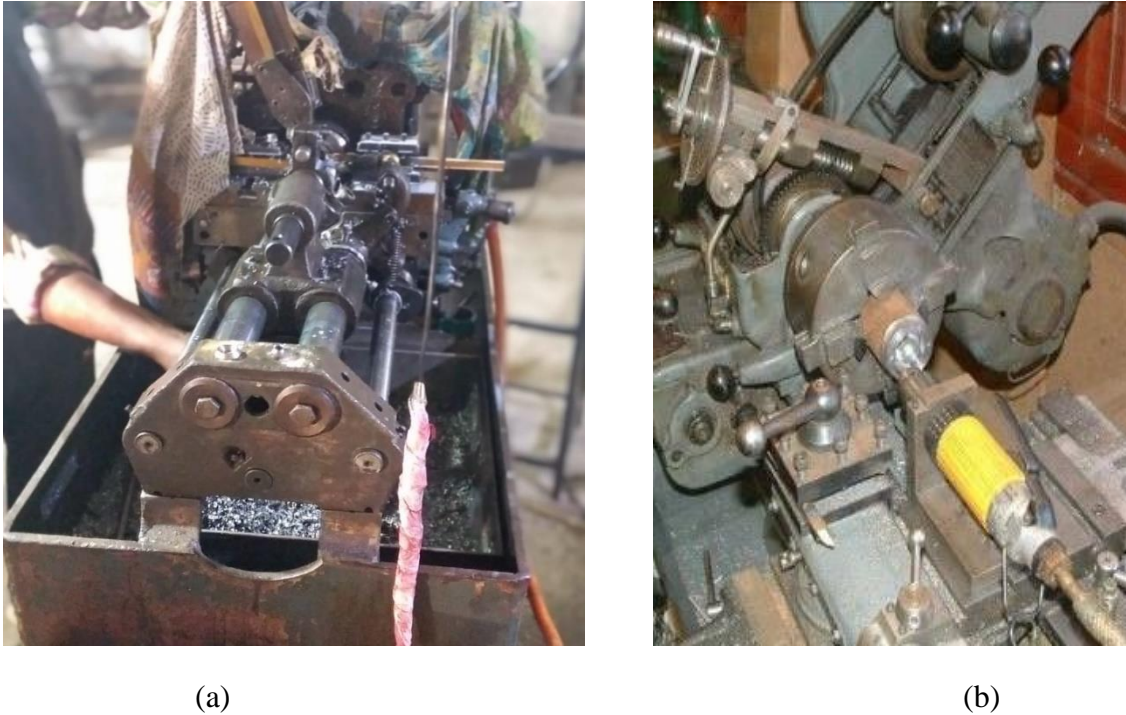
Lathe machine tool before and after incorporation of air pressure gun to remove burrs at tool workpiece interface
